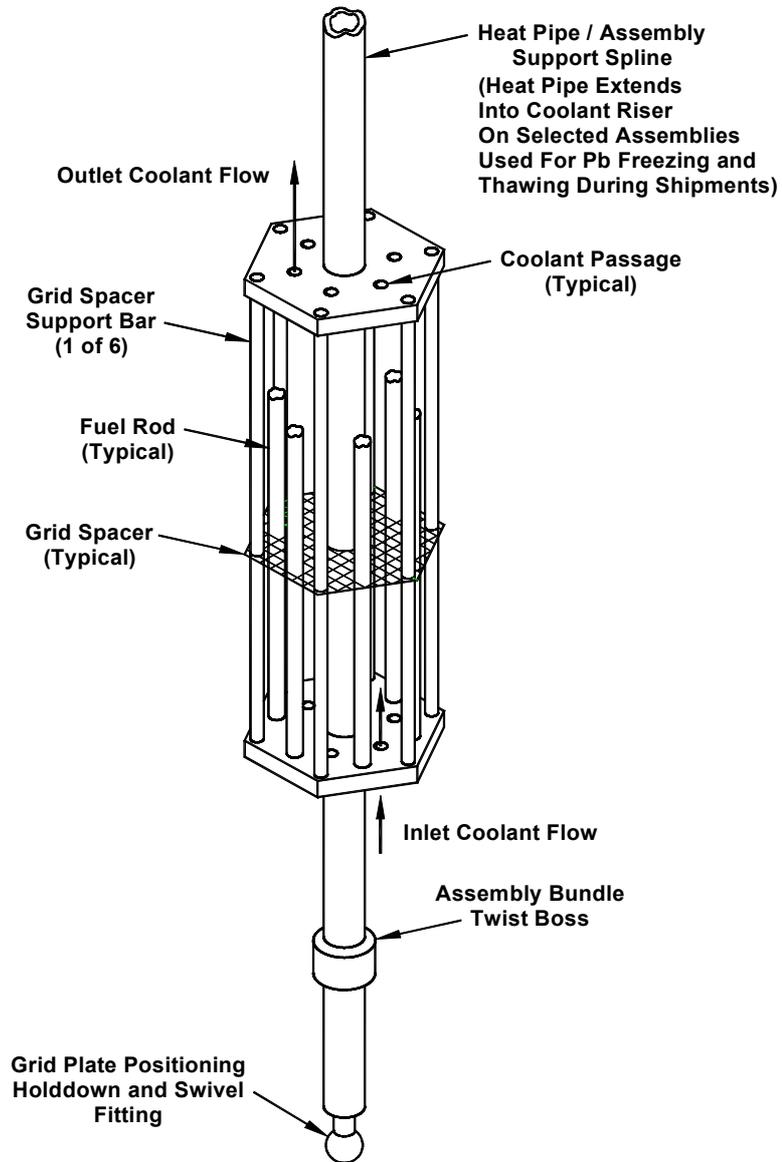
Open sided fuel assembly with local grid spacer, mounted on a central heat pipe support spline.
